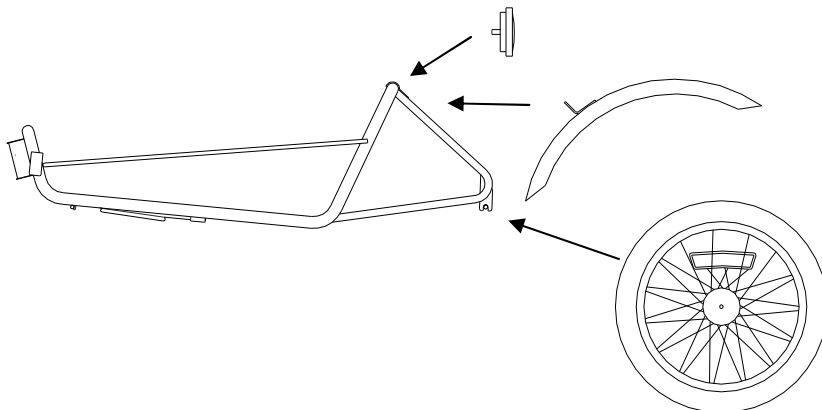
Maya Cycle trailer, wheel and fender attachment
